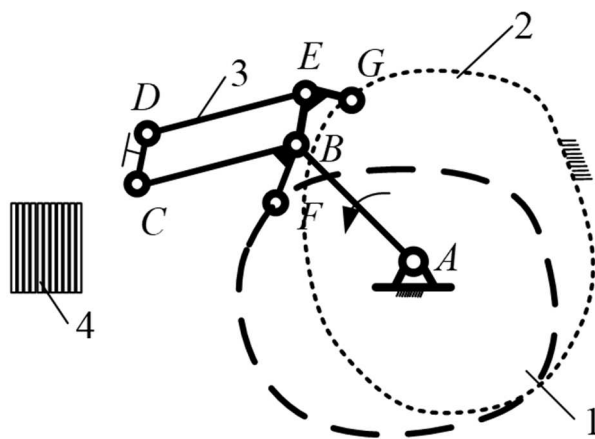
Structure diagram of double cam five bar paper taking mechanism
